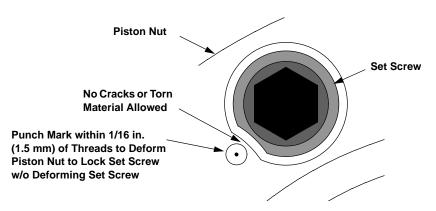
STAKING COMPRESSOR PISTON NUT TO LOCK SET SCREWS
